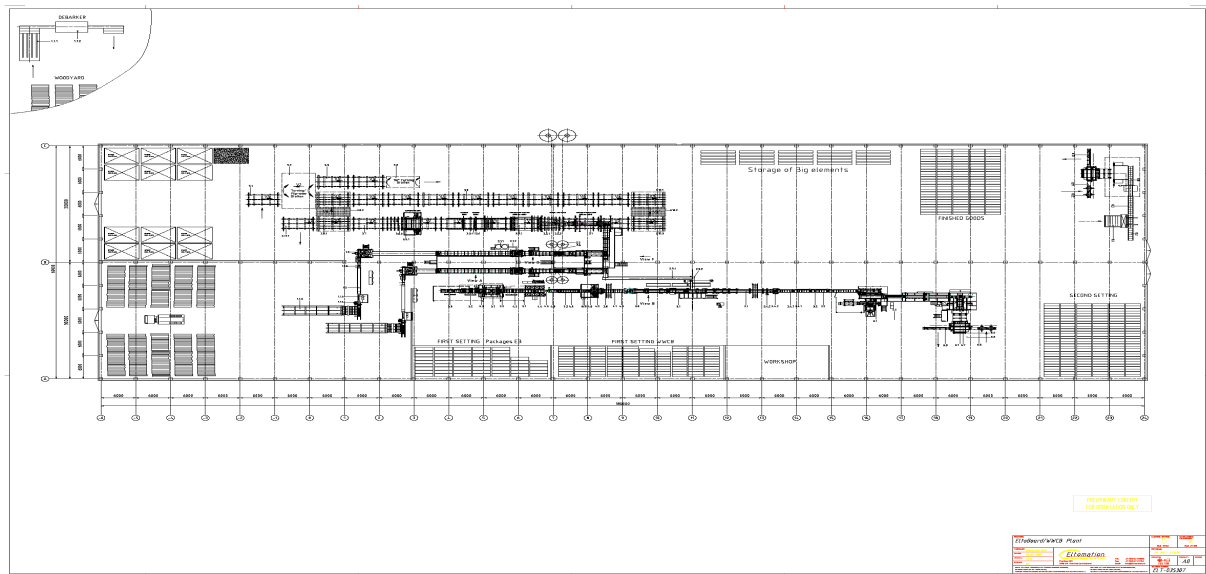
Plant layout for a combined WWCB-EB Plant and Large Wall Element Line.
